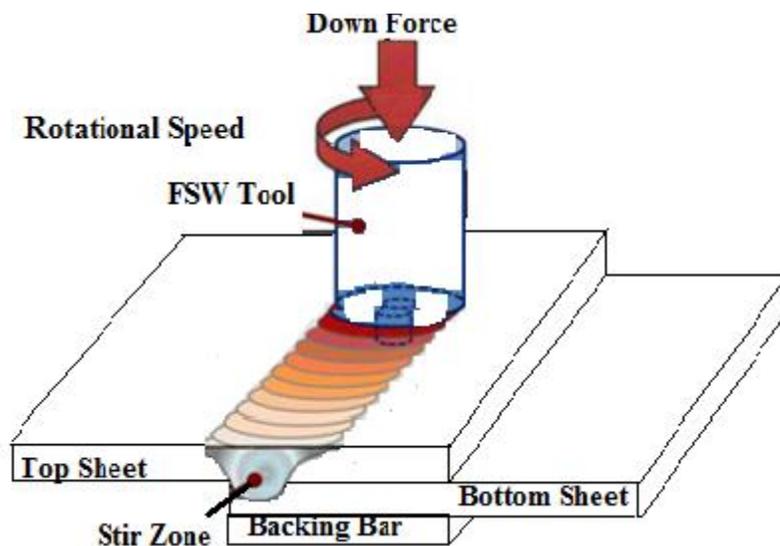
Principle drawing of the FSW process for joints with indication of the main parameters
